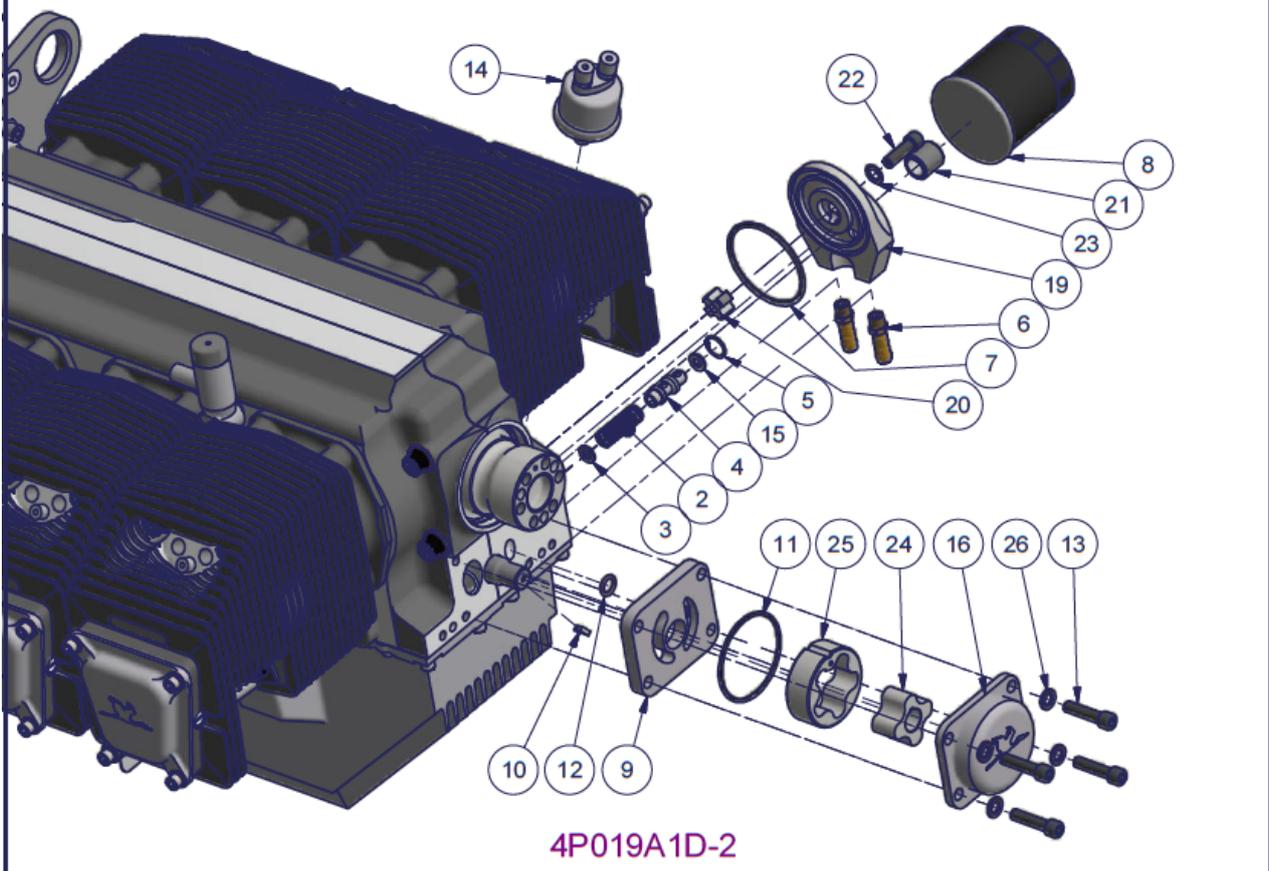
3300 Oil pump and filter installation (billet crankcase) – Parts List
